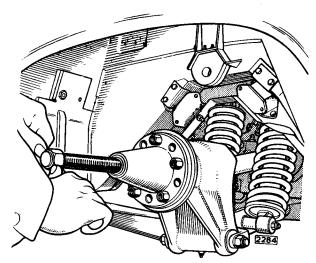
Removing the rear hub with the extractor (Churchill Tool No. JD. 1C).
